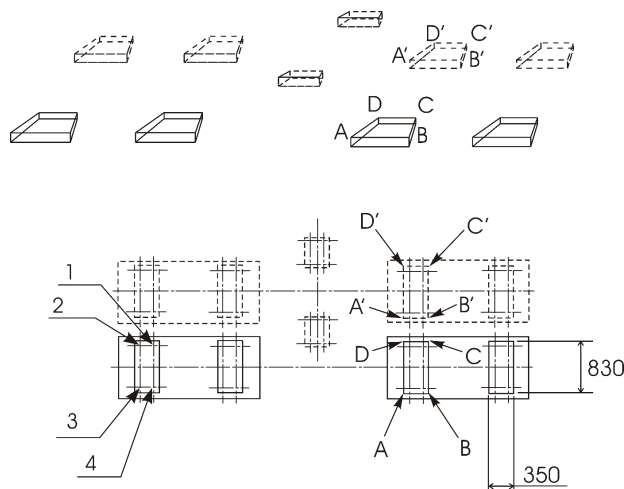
Possible positions of the rectangular plates where the brackets of a linear electromagnetic actuator could be fixed.
